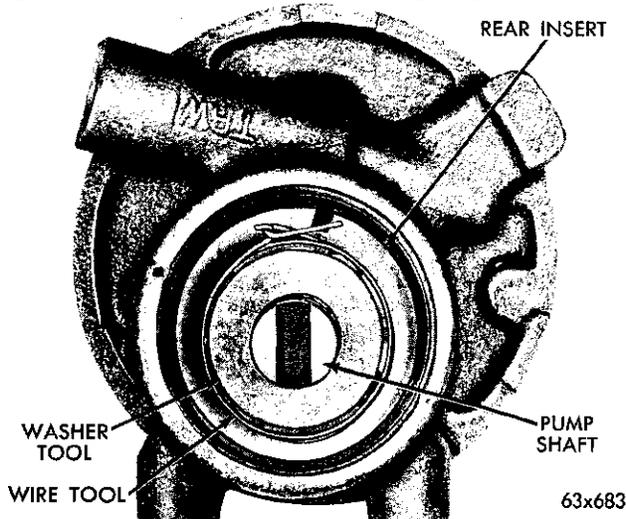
Installing the Rotor, Shaft and Slippers Assembly
